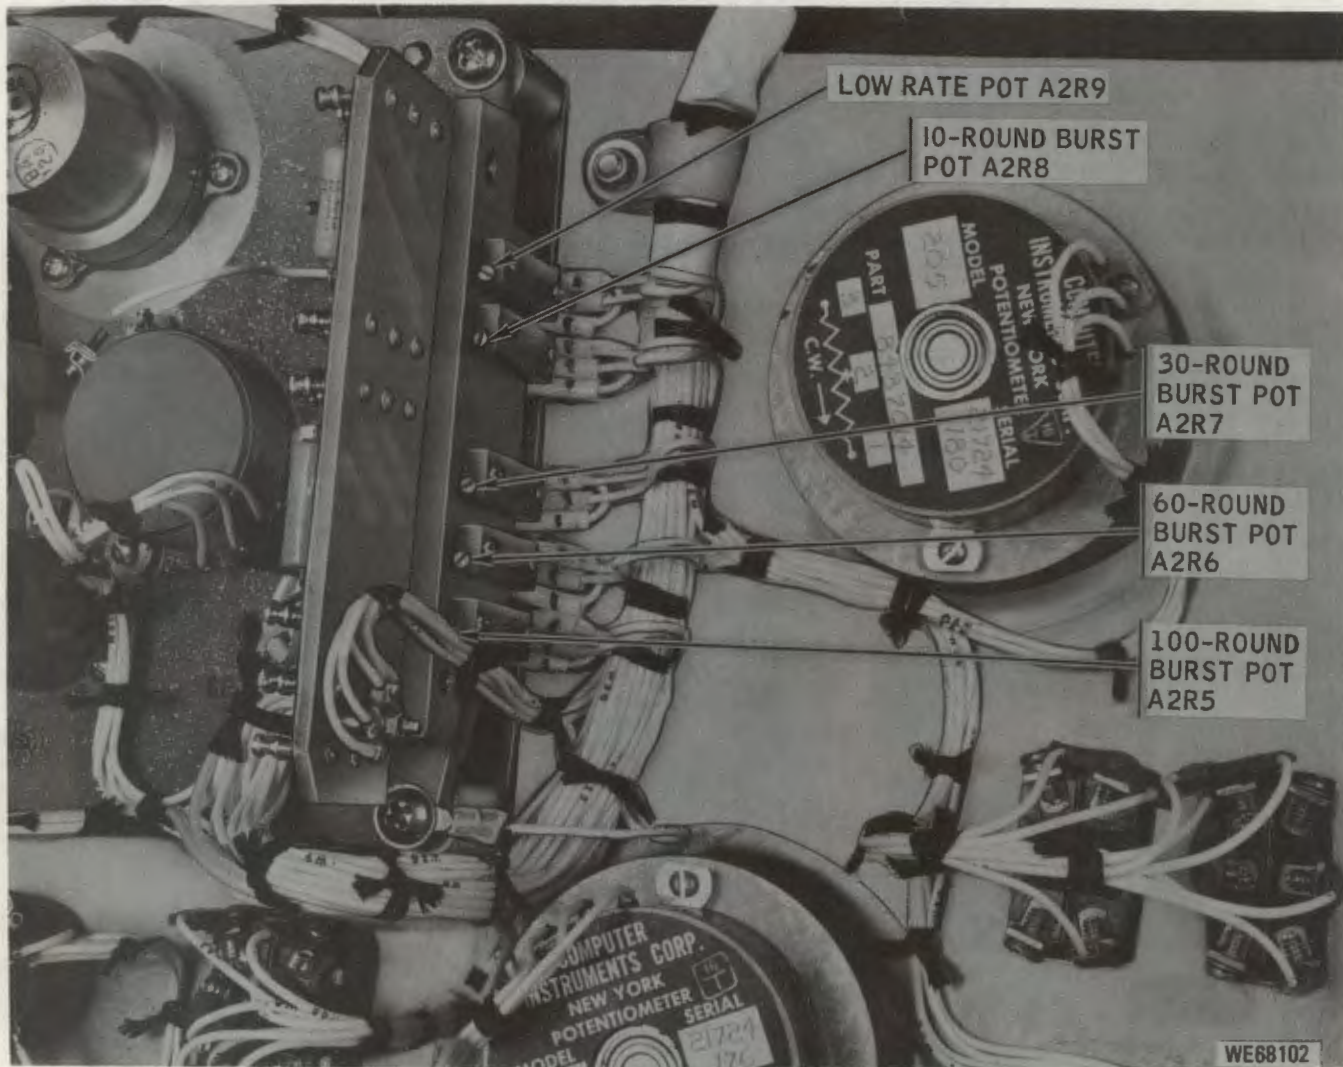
Control panel assembly, parts location - sheet 2 of 2.
